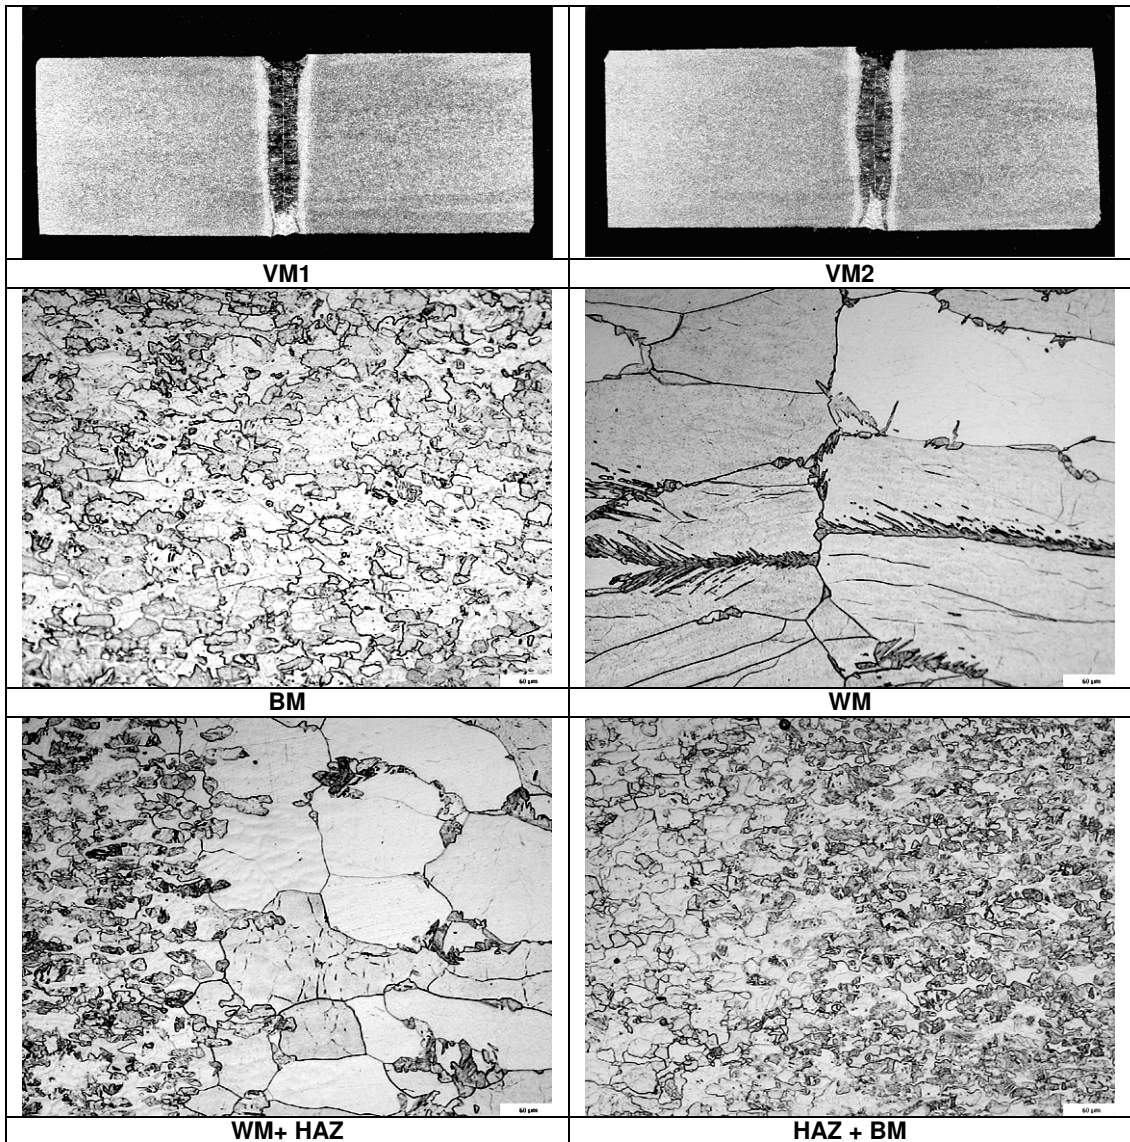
Macro and microphotographs of 12 mm thick LASER weld without filler metal (V).
